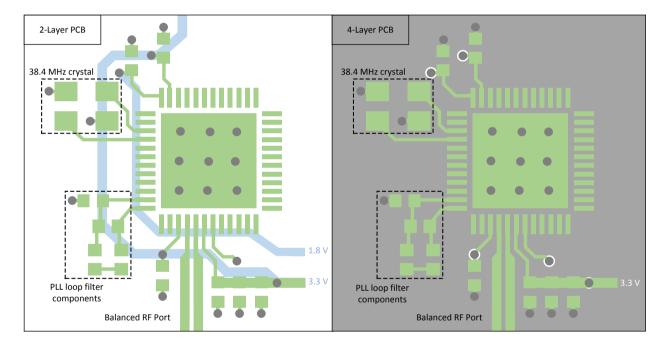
DW1000 Layout on 2 and 4 Layer PCBs
